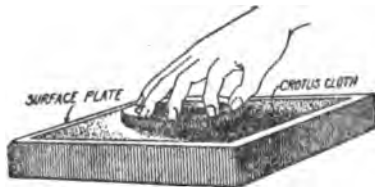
Method of dressing or lapping piston ring to fit the groove in piston on a surface plate.
